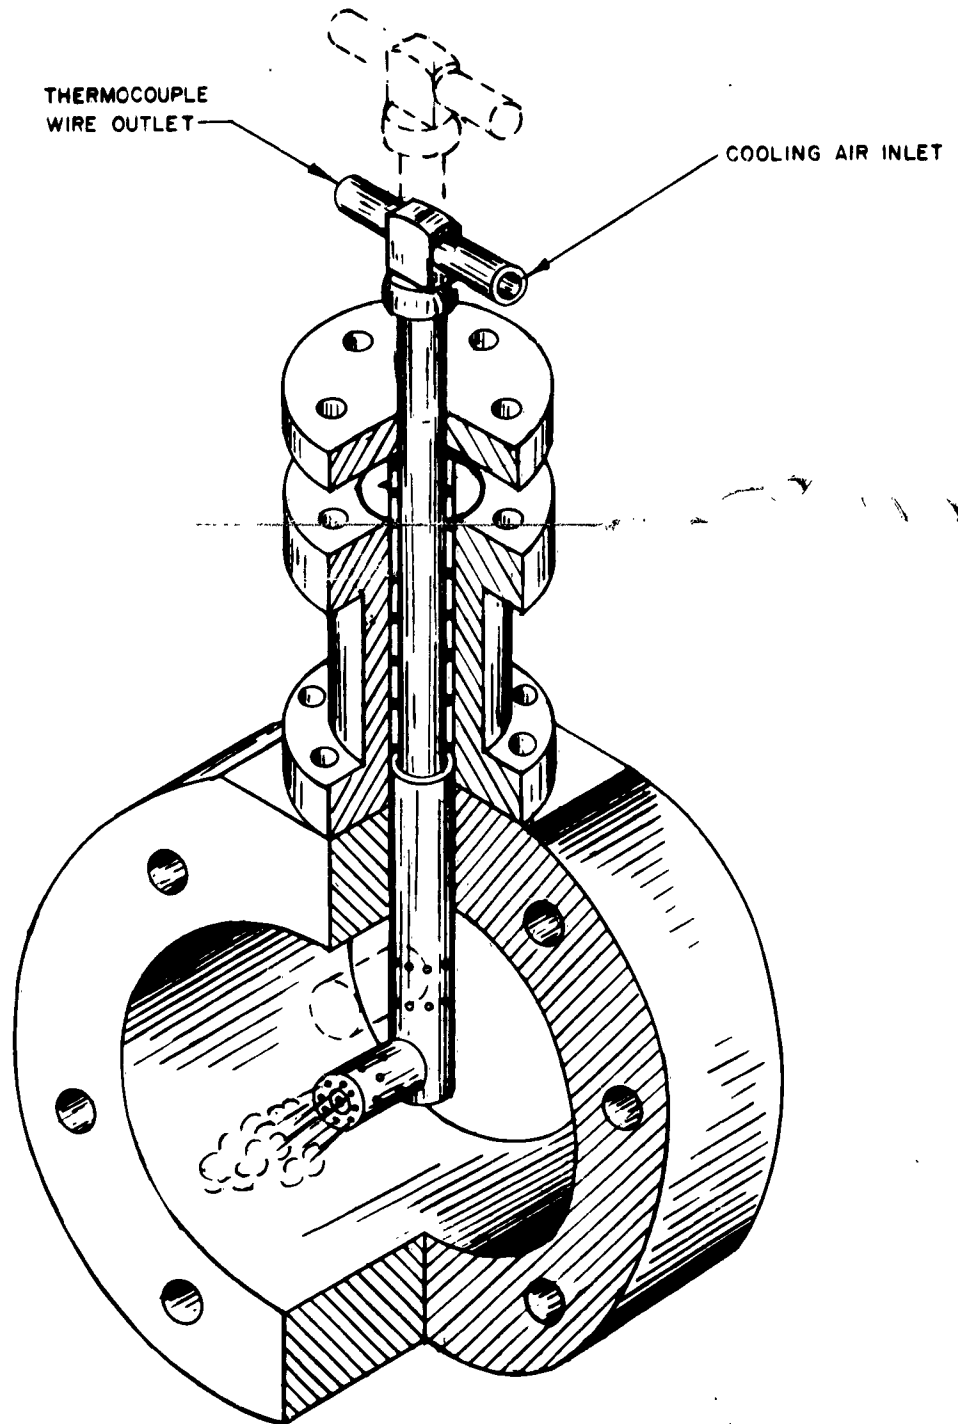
Perspective Cut-Away View of Stagnation Enthalpy Probe Assembly
